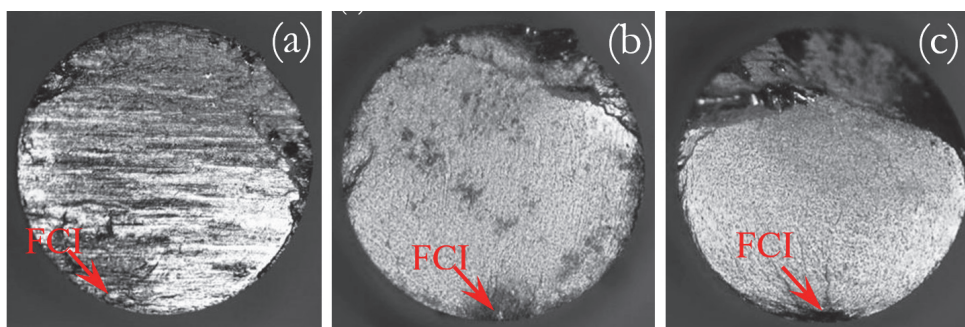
Stereoscopic microscope images showing an overall view of fatigue fracture surfaces of the samples tested at a total stress amplitude of 90 MPa (a) for the as-extruded sample, 120 MPa (b) and 125 MPa (c) for the forged sample. The red arrows indicate the crack initiation site. The fatigue cracks were initiated near the sample surfaces. FCI-fatigue crack initiation.
